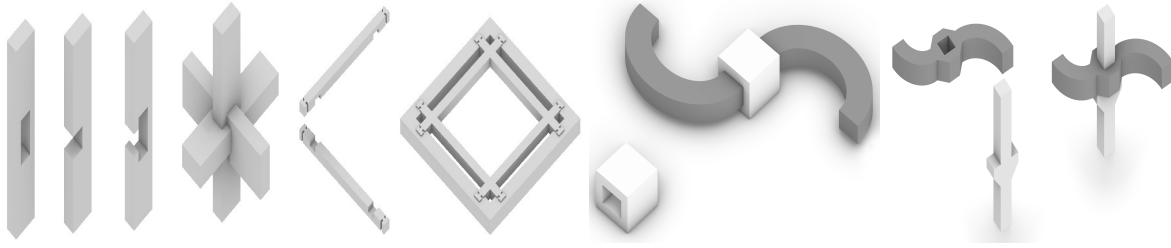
Proposed geometries of Dry Connections for Water-Jet Cut
